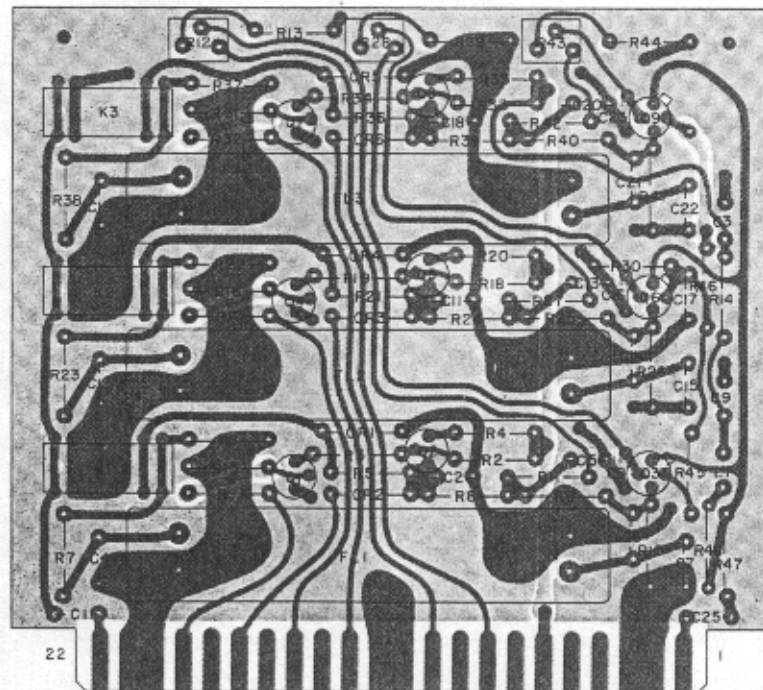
Type 72399-X IF Filter Assembly (A4, A6), Location of Components
